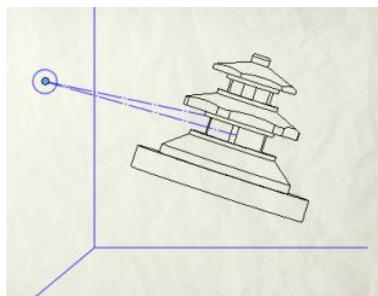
Six-axis Wire Electrical Discharge Machining Design
